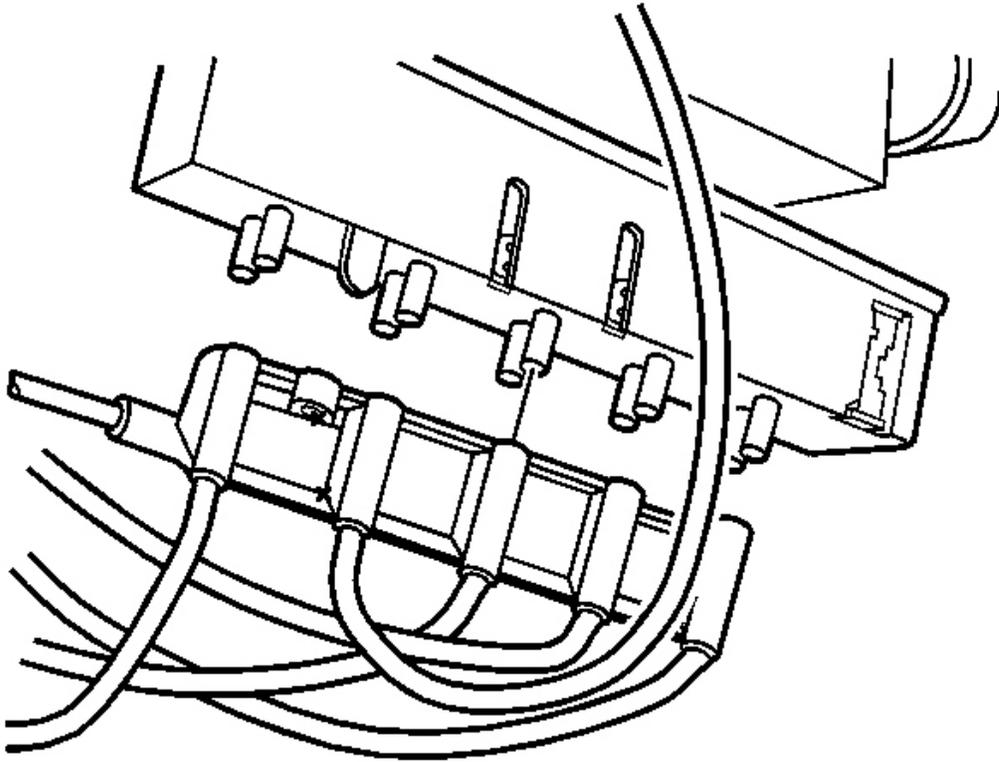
Vacuum Control Solenoid & Vacuum Harness Connector
